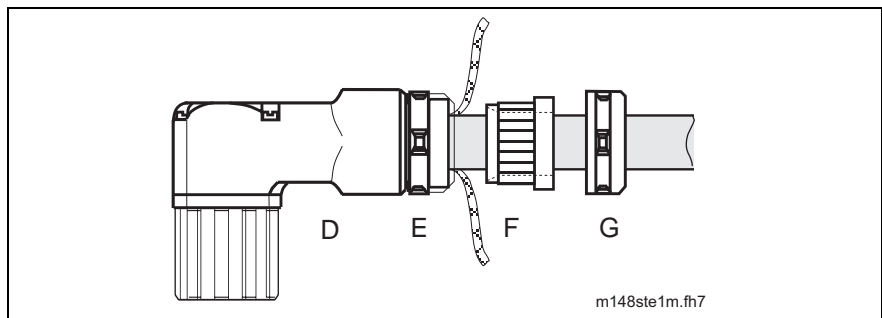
Assembling an angle feedback connector with conduit thread
